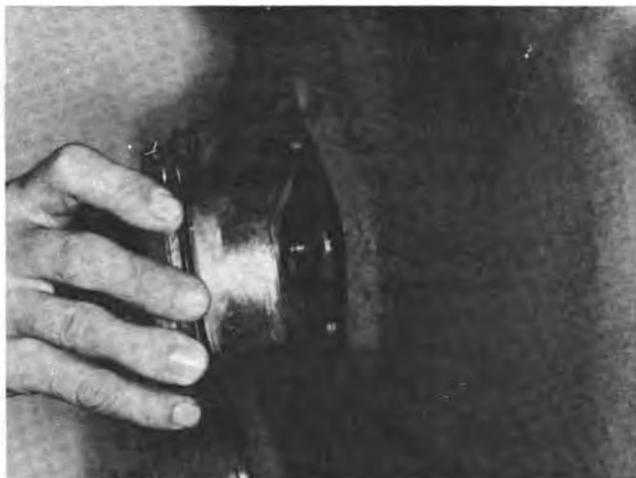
(N114187). The Camshaft Bearing Support.
